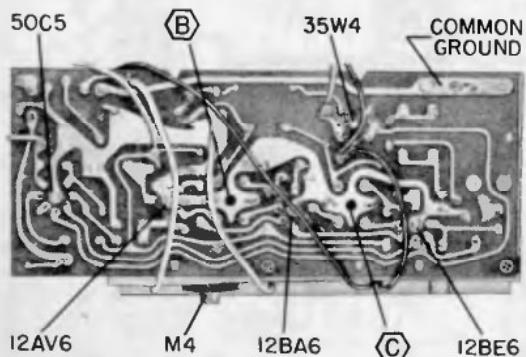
Bottom View of 5D4 Chassis Showing Alignment Points and Tube Locations. 5B4 chassis has same location for tubes and alignment points. Common ground is also the same.
